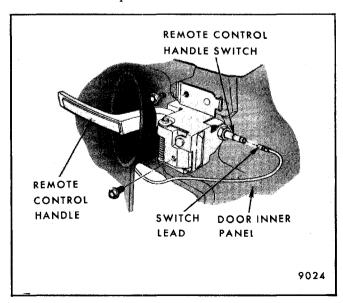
Automatic Door Lock Remote Control Switches (Cadillac Styles)
